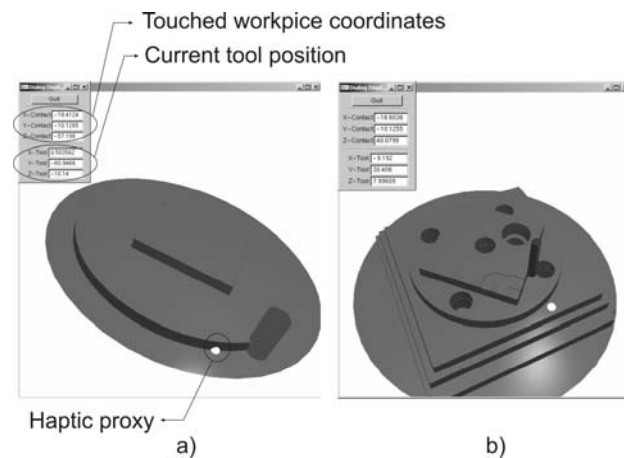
NC machining program verification display a) cutting process, b) final machined workpiece
